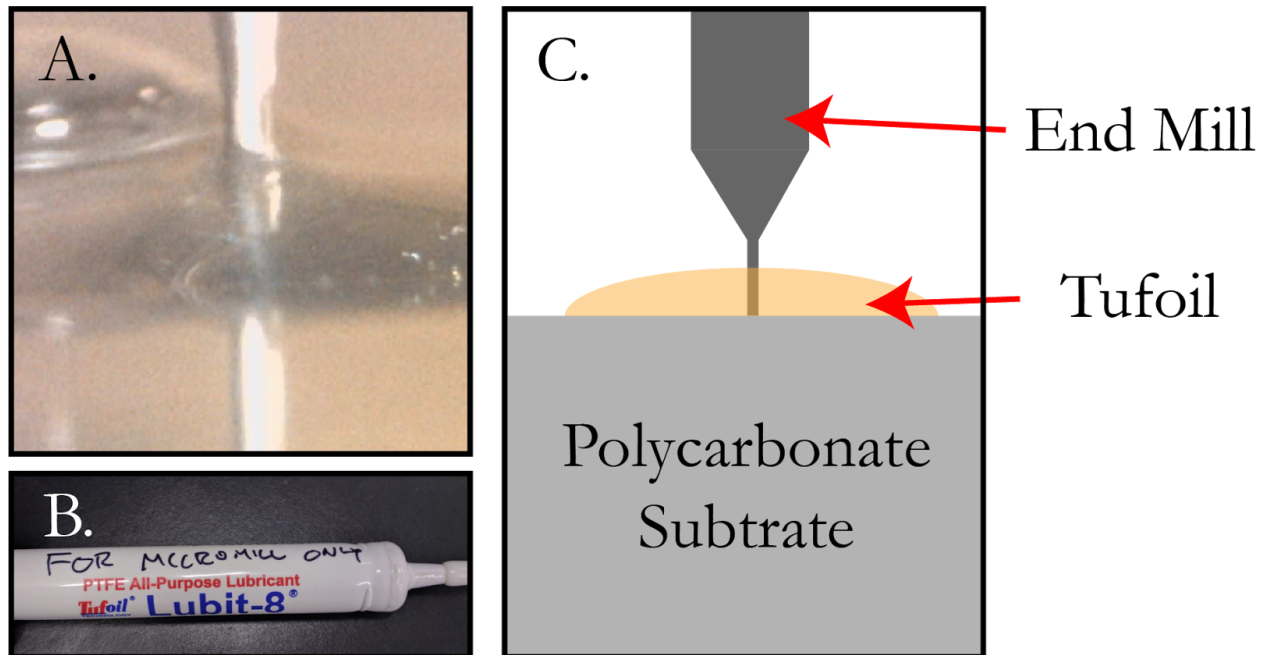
(A) Image of end mill in ‘Tufoil’, machining the surface of PC. Reflection evident due to reflective surface. (B) Container of Tufoil purchased via McMaster-Carr. (C) Accompanying graphic to further detail (A).
